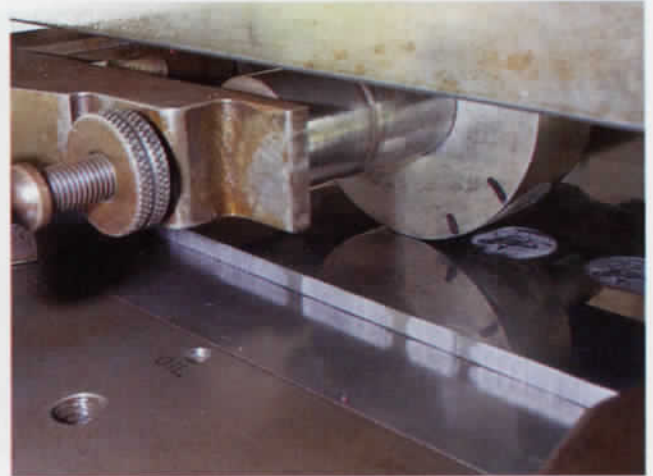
Transfer roll in transfer press, showing marks on side of roll at top and bottom of relief. Courtesy of Michael Bean.
